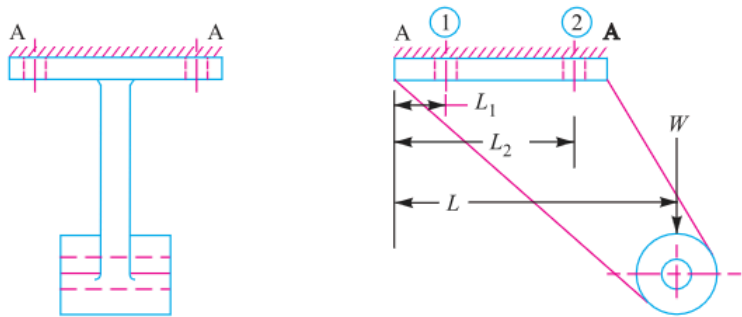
Eccentric load acting parallel to the axis of bolts.
